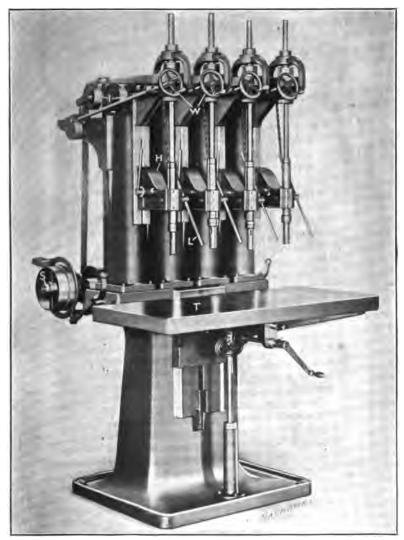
Henry & Wright Multiple-spindle Drilling Machine
